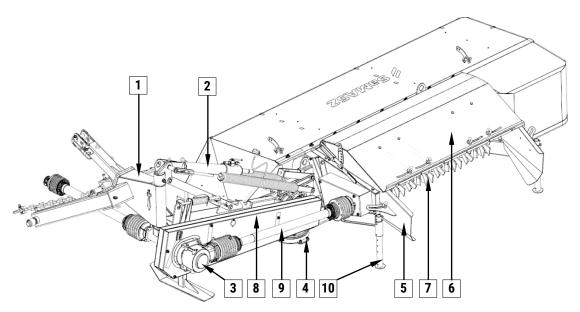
Parts of KDT rear disc mower with tine conditioner
